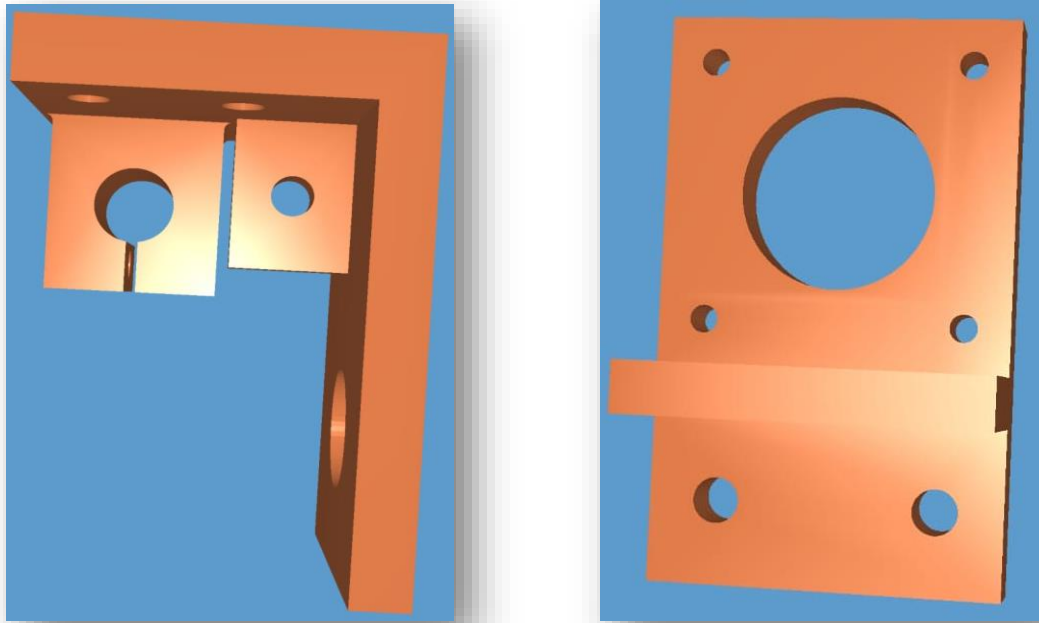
CADD diagrams of 3D Printed parts used in making of Two – Axis Computer Numerical Controlled Foam Cutting Machine
